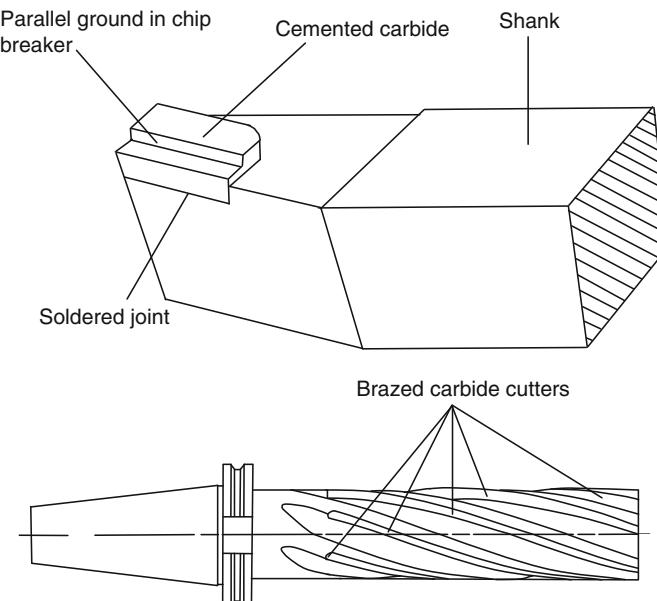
Turning and milling tools with brazed carbide tipped cutters
